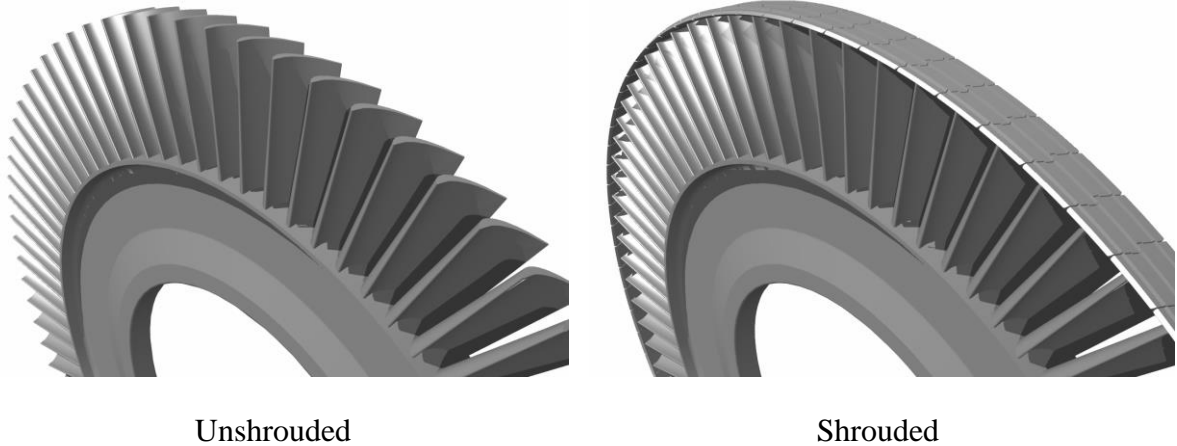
Unshrouded and shrouded bladed disk assemblies.
